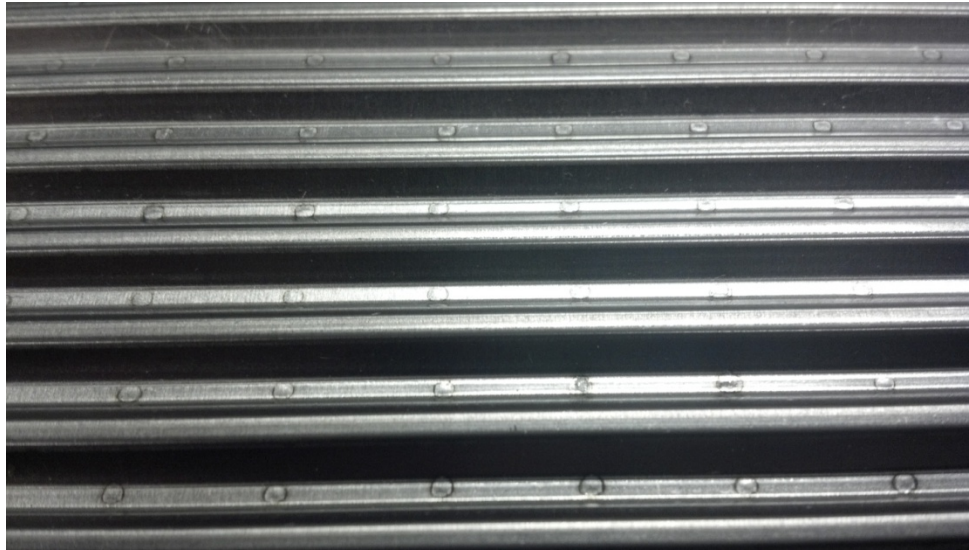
Corrugation to Backer Sheet Spot Welds
